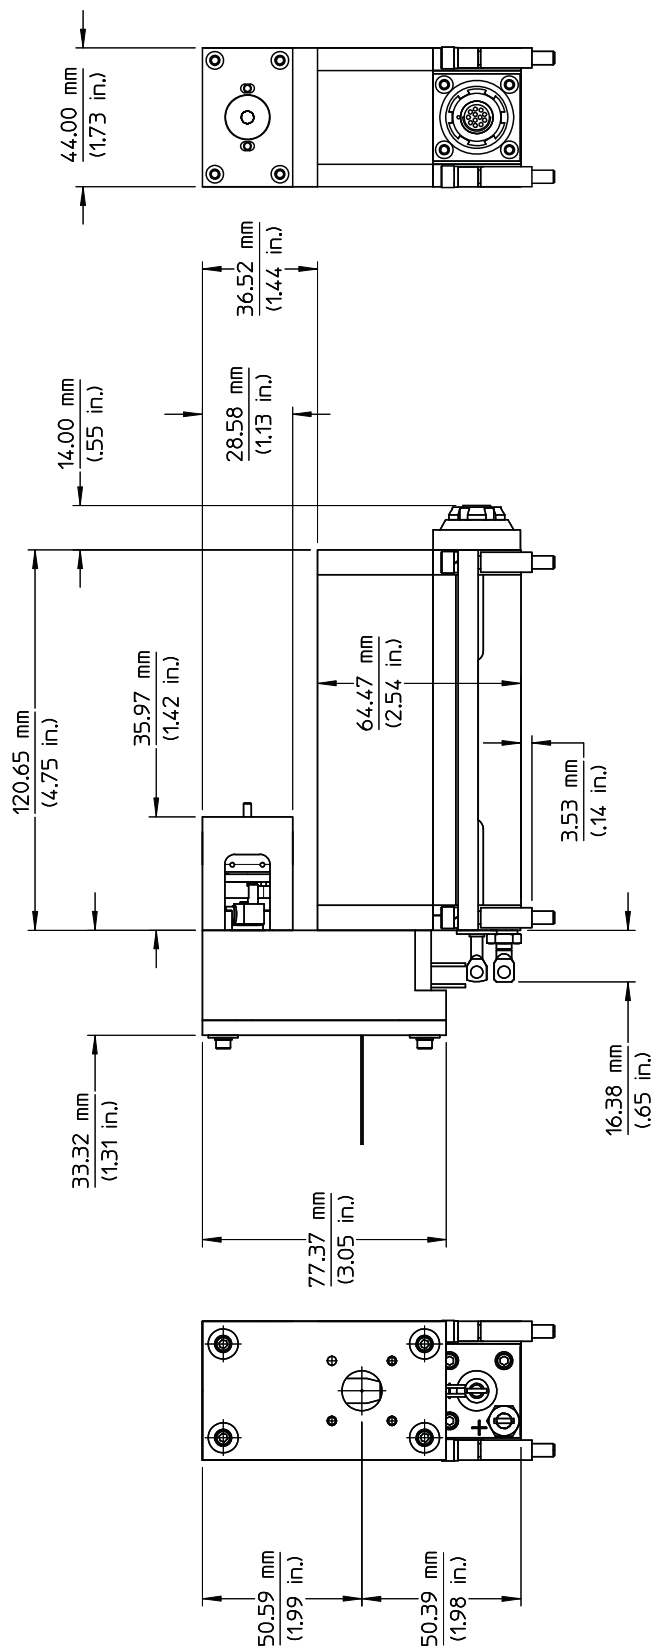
Head Dimensions with Electro-Mechanical Shutter
